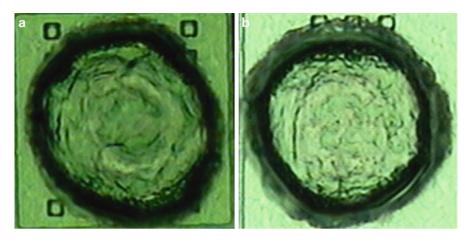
IMC coverage of (a) Cu wire ball bond and (b) insulated Cu wire ball bond
